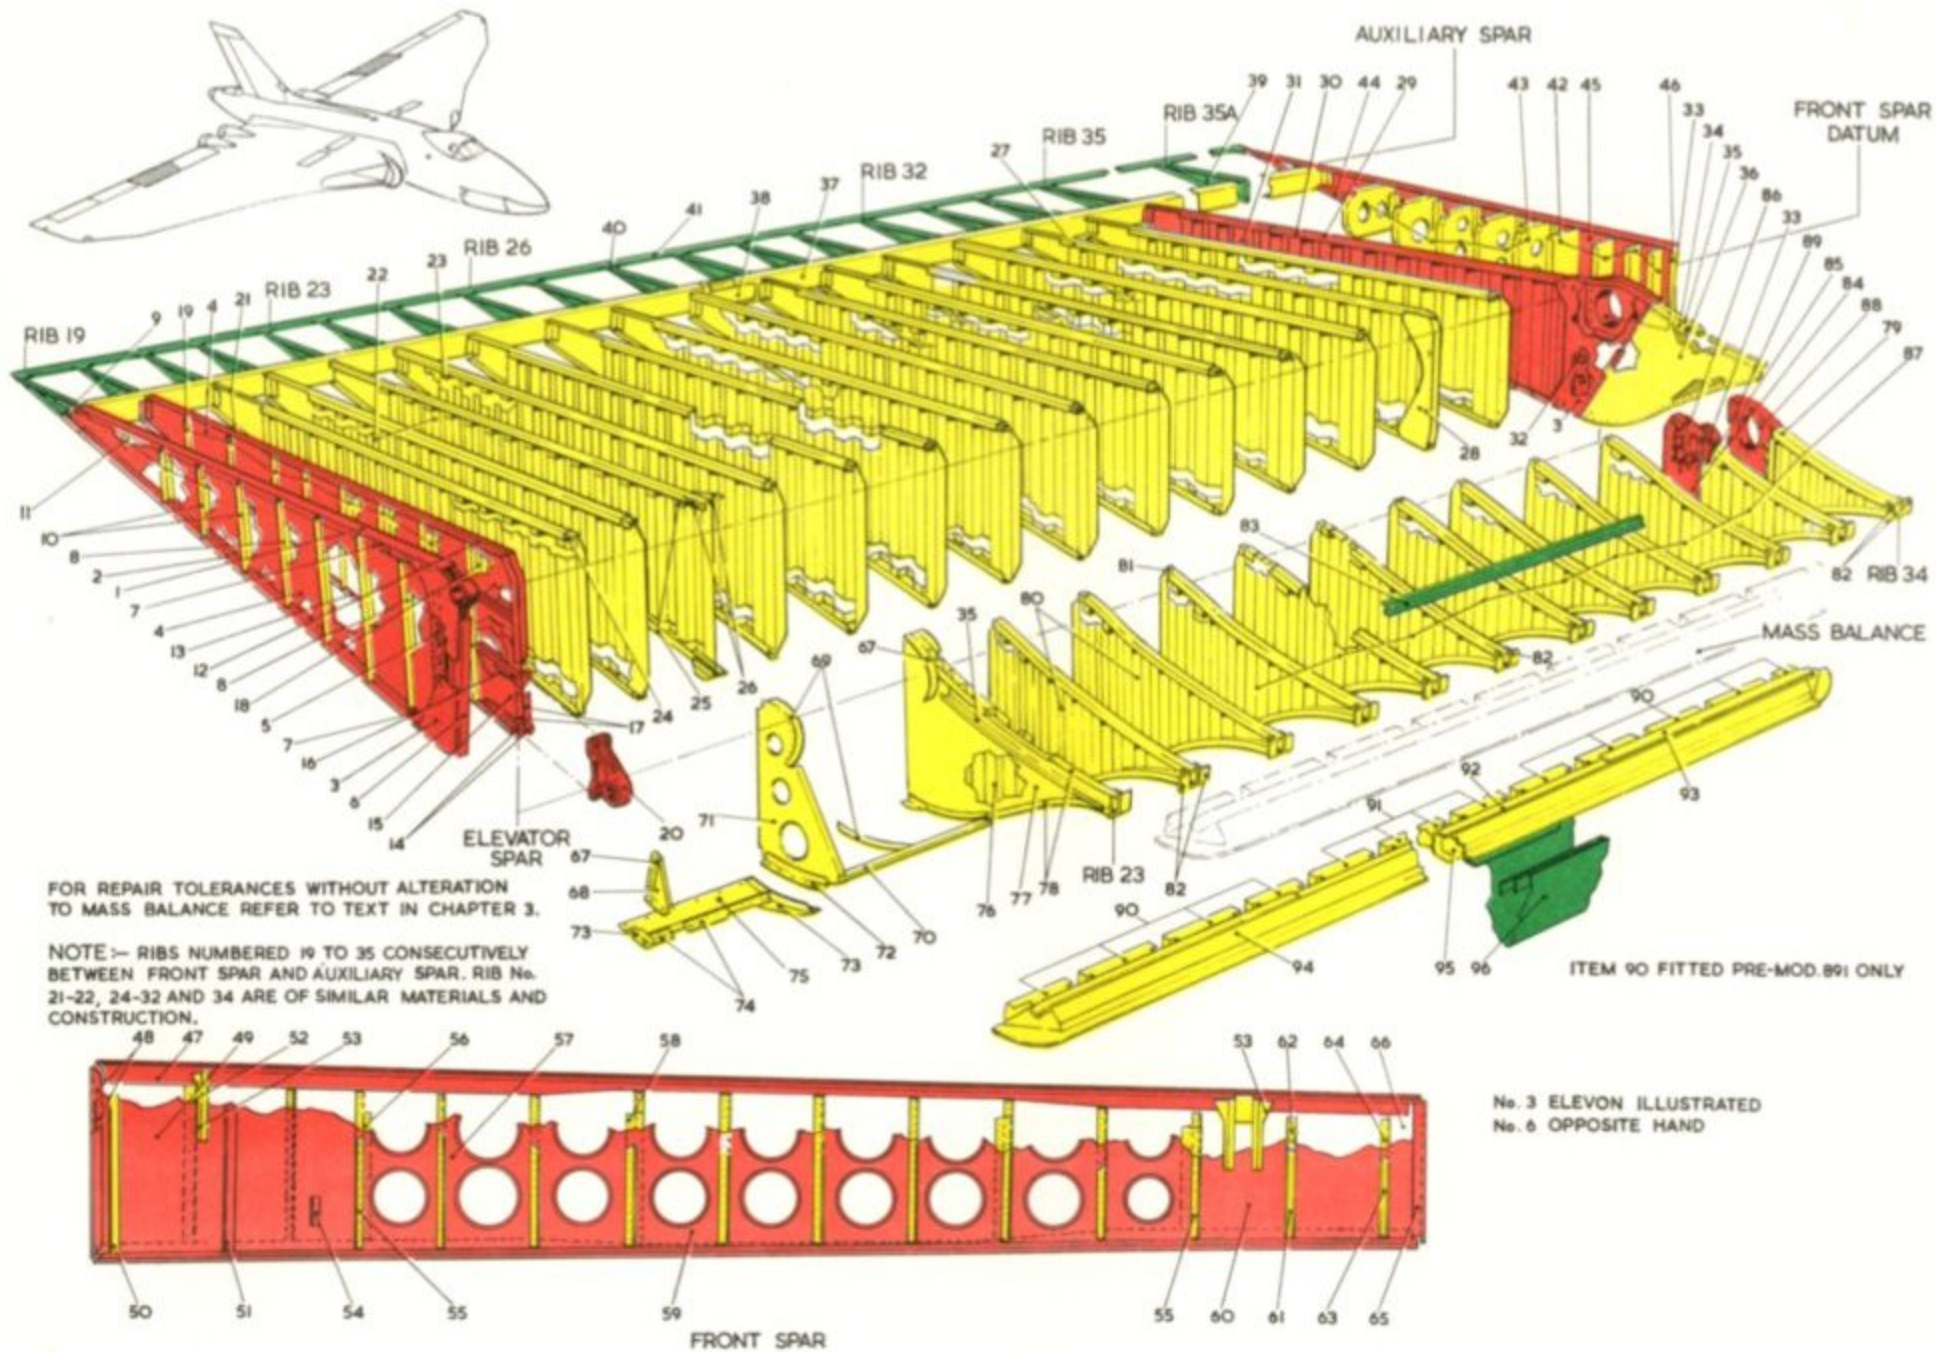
A Outboard elevator - No.3 elevon (No.6 opposite hand)
